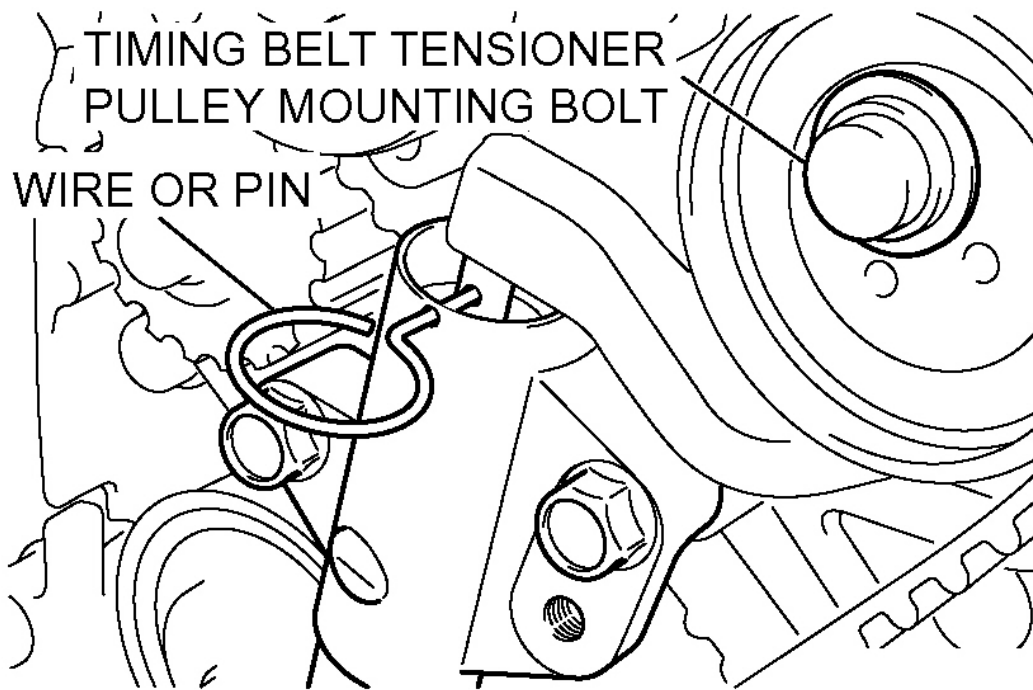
Aligning Timing Belt Tensioner Adjuster Rod Set Hole A With Timing Belt Tensioner Adjuster Cylinder Set Hole B
